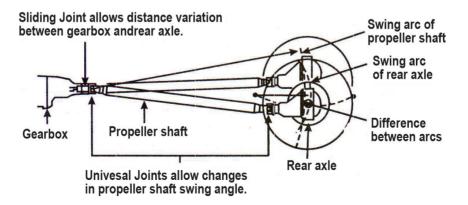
Components and Swing Arc of Propeller shaft and Rear Axle.
